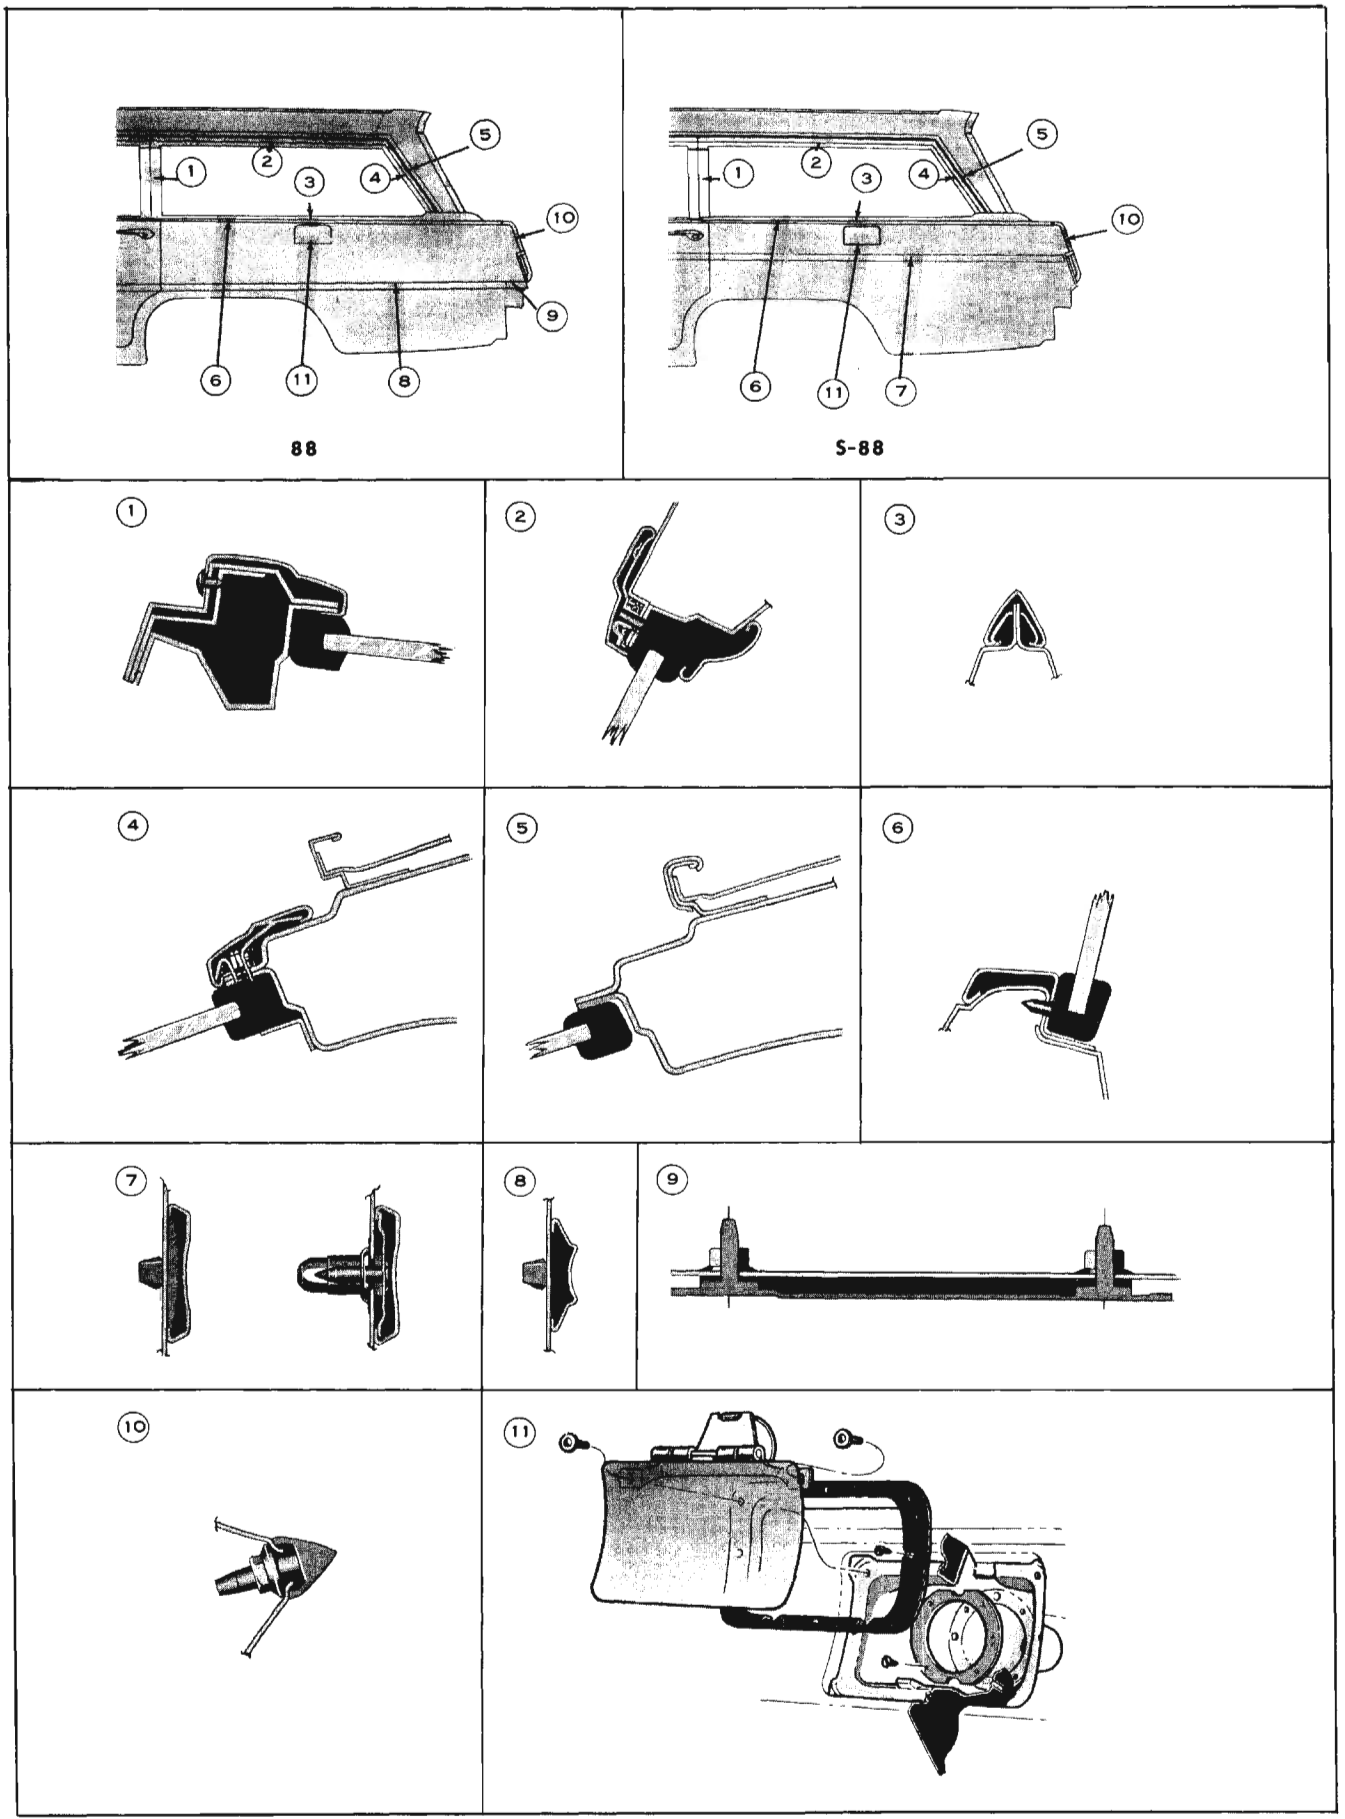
Quarter Panel Exterior Molding Attachment
